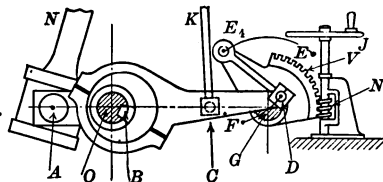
PRACTICAL APPLICATION OF MARSHALL VALVE GEAR
